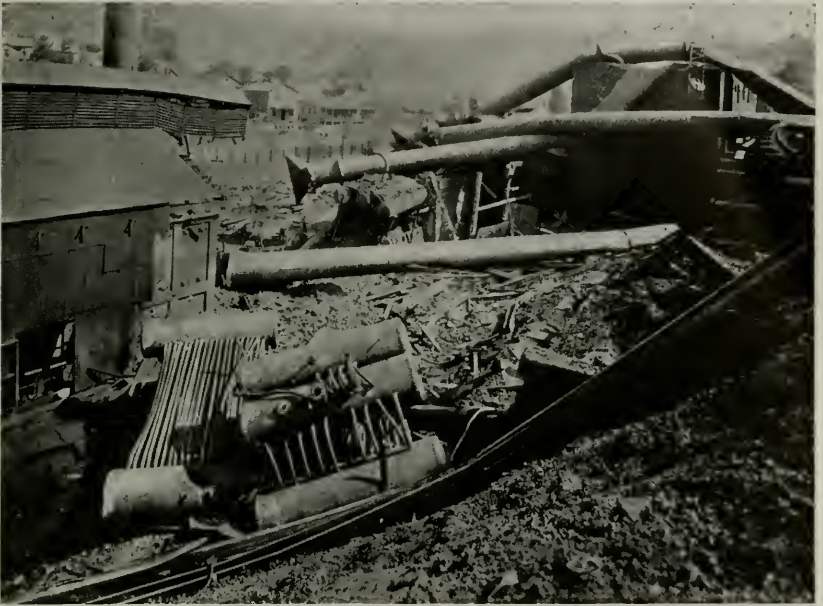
Wreckage at a steel mill following an explosion of a water tube boiler. Caused by external corrosion of one head of the lower drum which had been concealed in brickwork, the explosion killed two people and injured five others. Property loss was about \$75,000.
